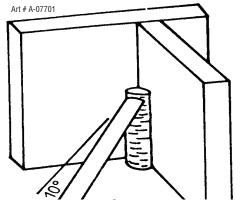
Single Run Vertical Fillet Weld
